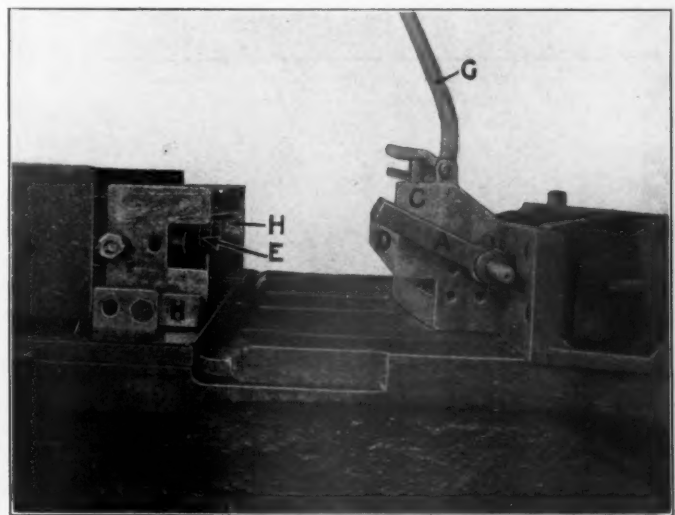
Dies in Place on the Bulldozer, Showing Stripper *D* Locked In Compressed Position
